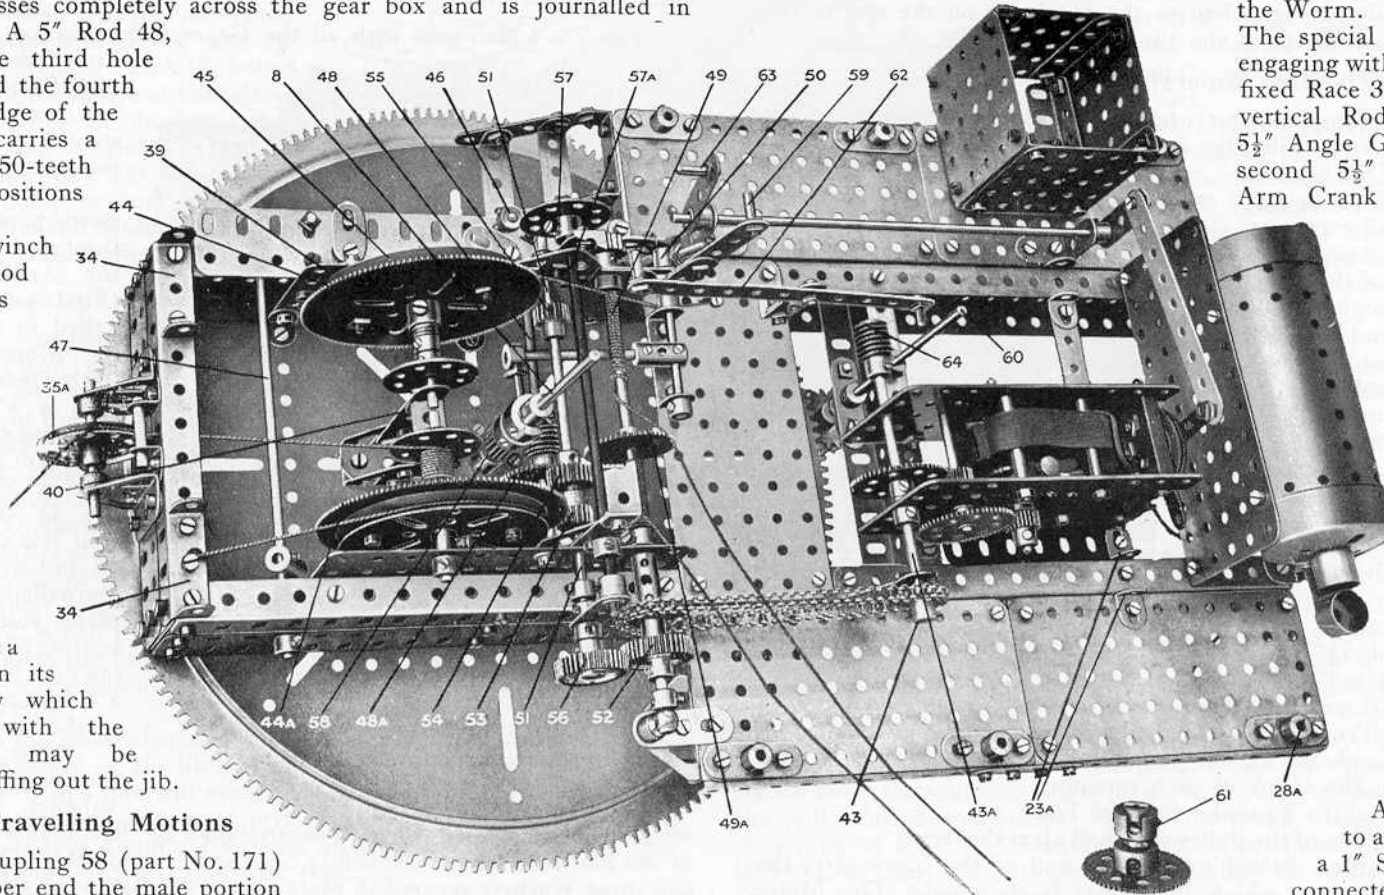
Plan view of the Superstructure, showing Gear Box, Motor, etc.
